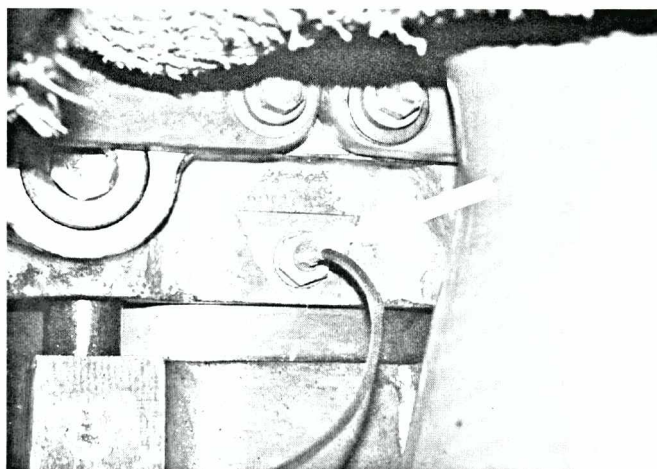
Place of fixing the inside-cylinder pressure gauge
